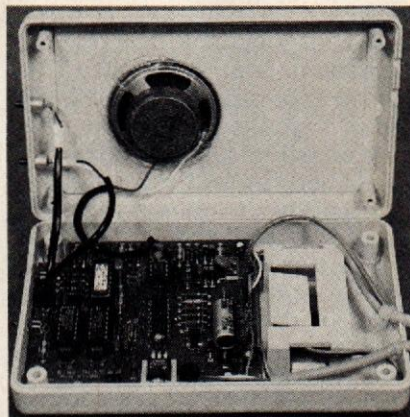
HERE'S AN INTERNAL VIEW of the main board.
